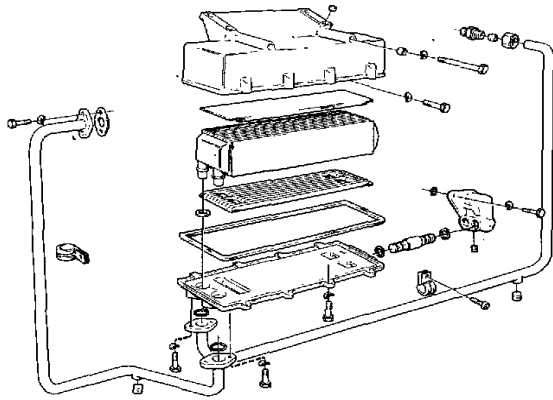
Oil cooler, TD70, TID70, TAMD70
